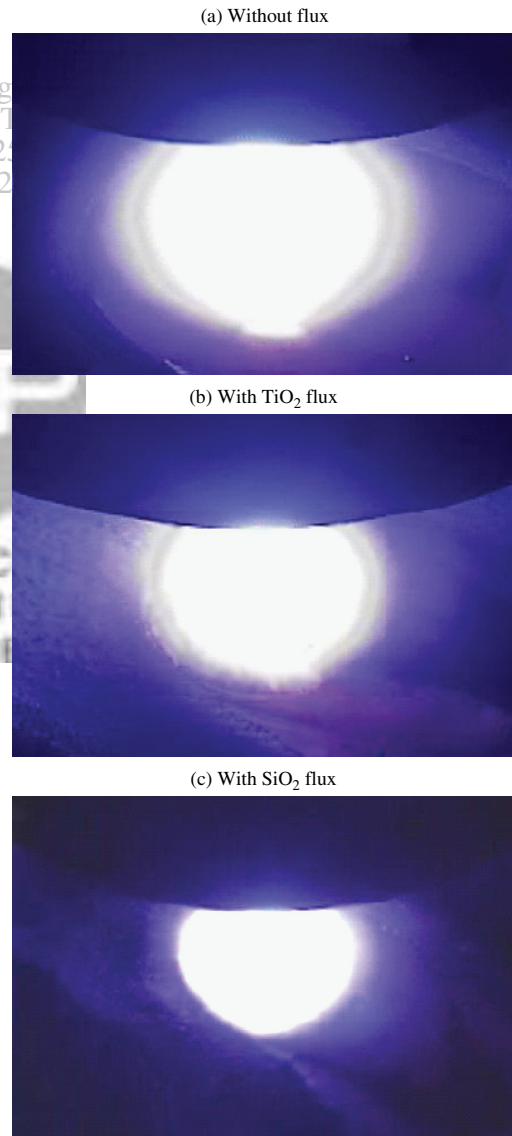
Anode root of TIG welding made with and without flux.
